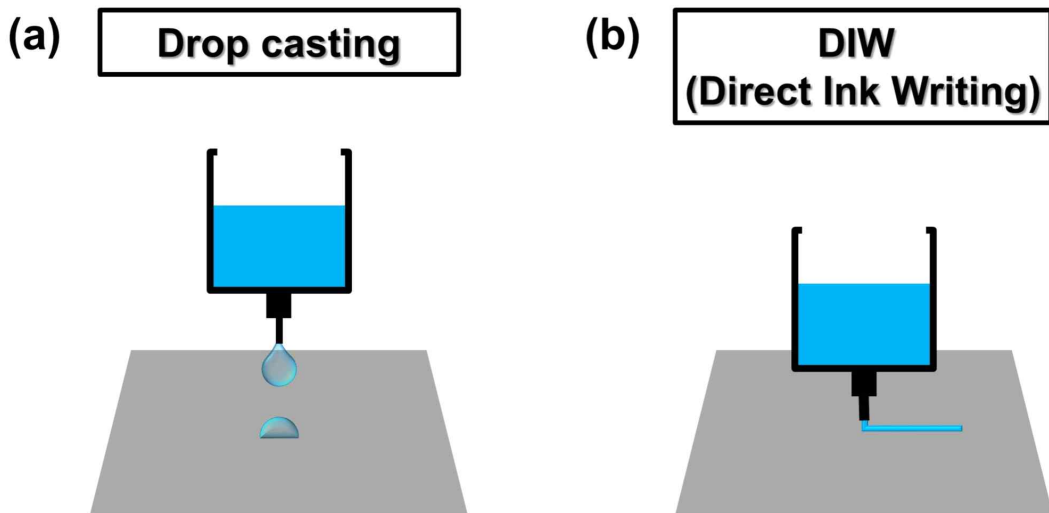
Types of extrusion printing methods. (a) drop casting, (b) DIW (direct ink)
